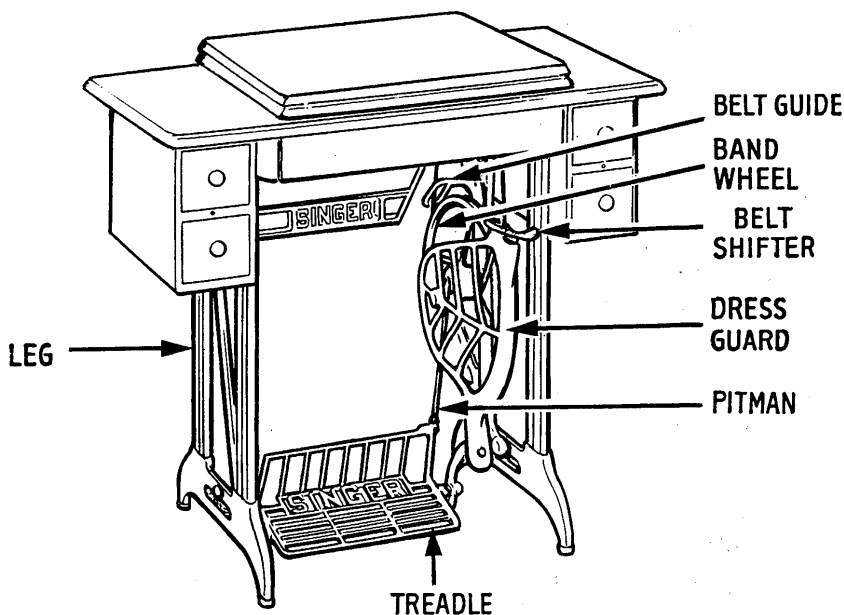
PRINCIPAL PARTS OF THE CABINET TABLE STAND.
